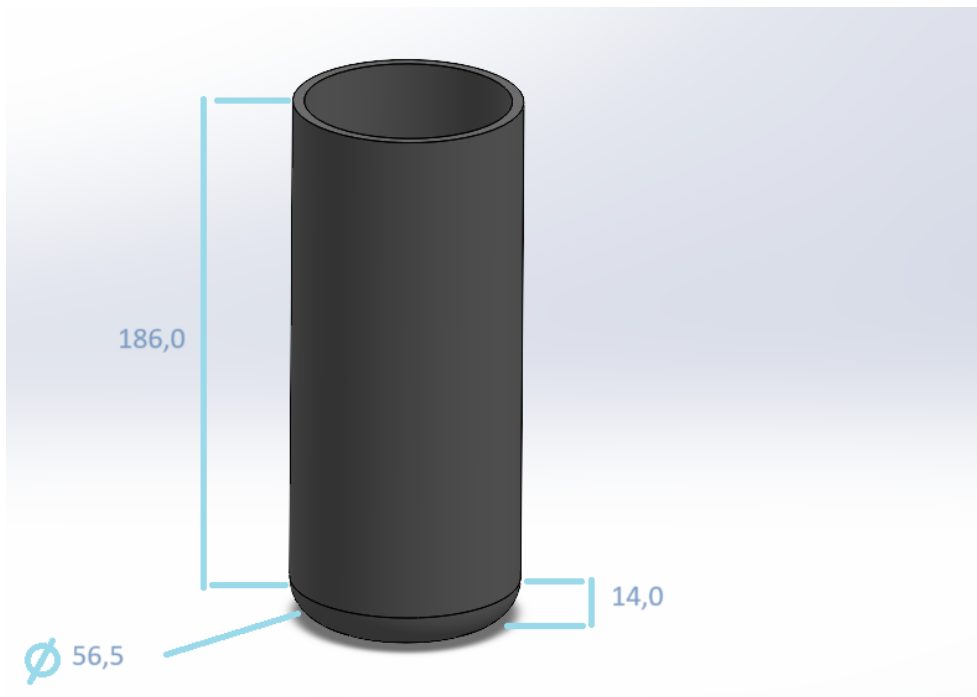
Dimensions in mm for the POM casting on the bottom of the steel tube, seen from the side.
